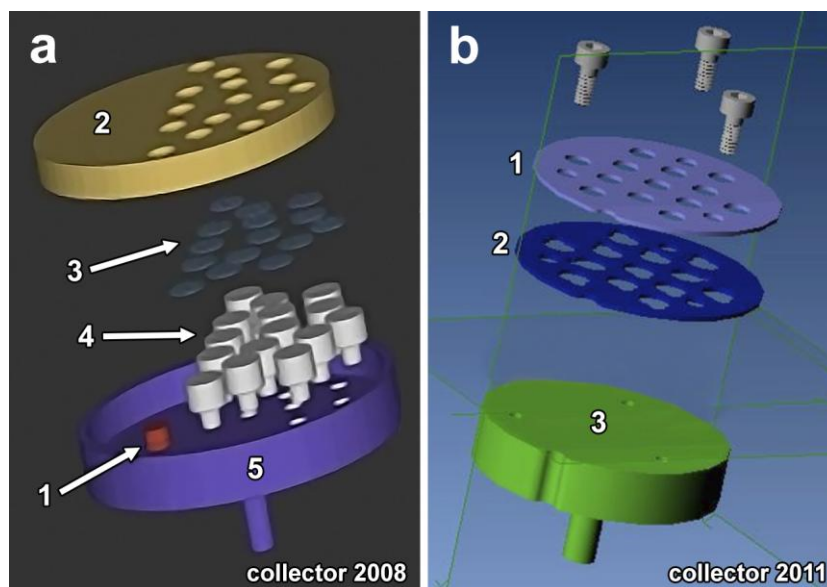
An exploded views of the assemblies holding the substrate for the TEM grids. In a) The 2008 configuration with (1) a screw fixing the gold plated holed-mask to the external stainless steel frame; (2) the gold plated holed-mask; (3) the TEM grids; (4) stainless steel pins and (5) the external stainless steel frame of the assembly and in b) the 2011 configuration wherein the TEM grids (not shown) are sandwiched between the two holed discs (1,2) mounted on a round stainless steel base (3).
